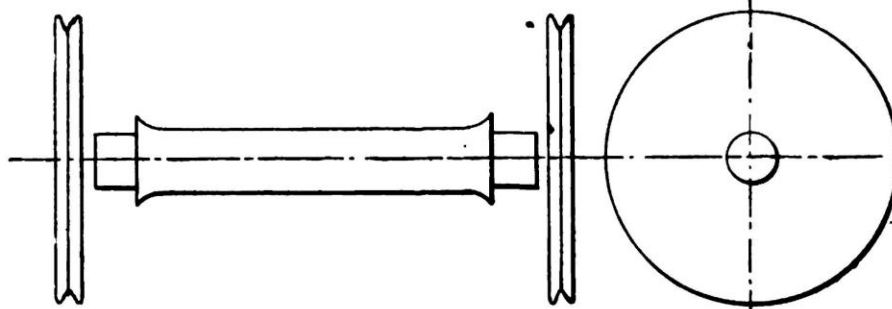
SHEATH AND DRIVING WHEELS. (½ Full Size.)
